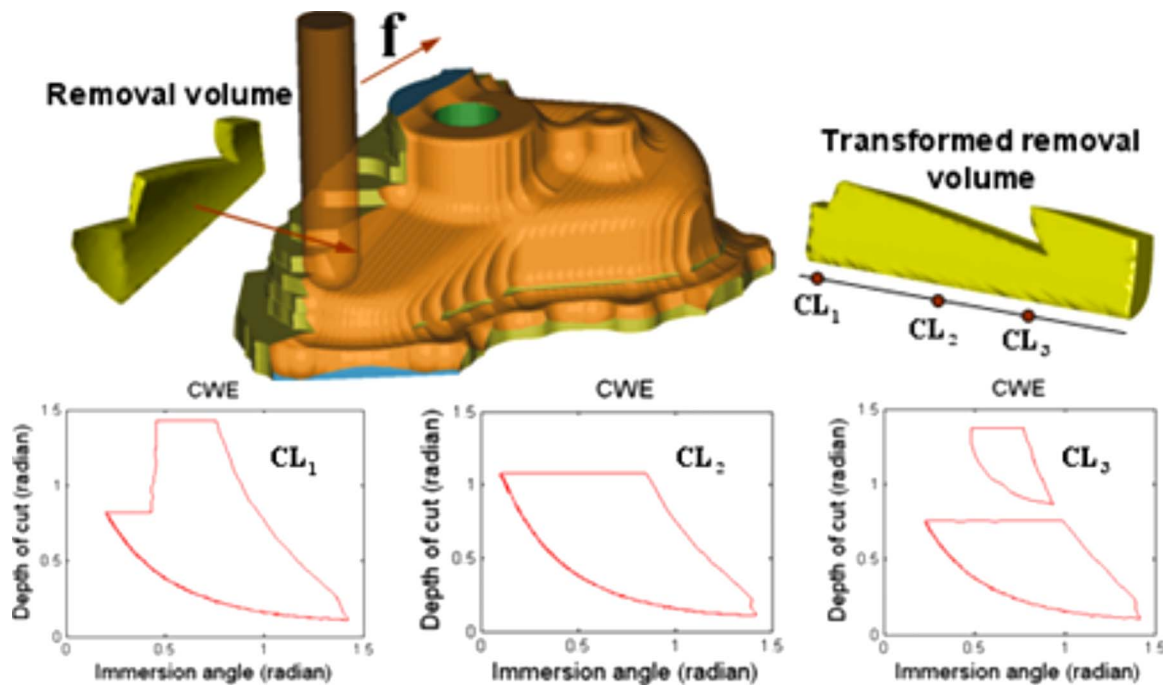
CWEs for ball end mill performing a linear three-axis move
